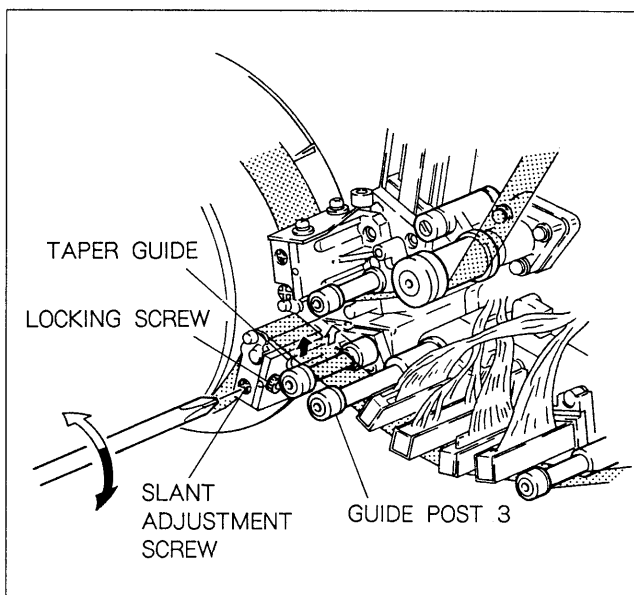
Exit Slant Guide Slantness Adjustment
